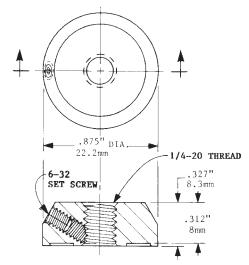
MUSHROOM RECEIVER DIMENSIONS
